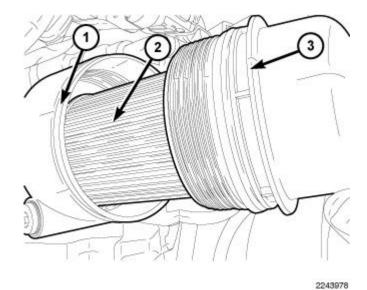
Engine Oil Filter Housing Courtesy of CHRYSLER LLC
